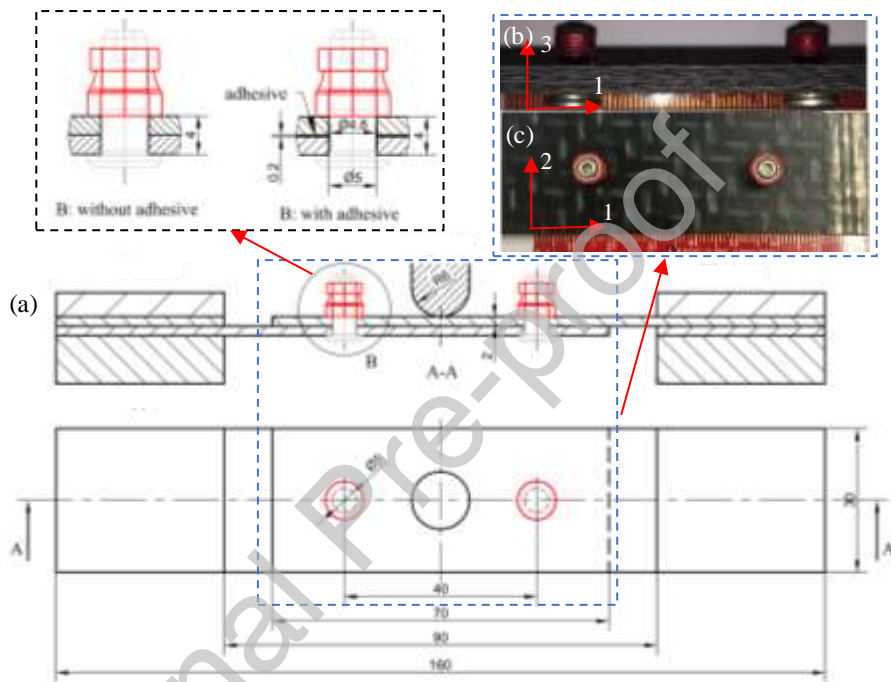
Specimen configurations (all dimensions in mm): (a) Detailed dimension; (b) Side view; (c) Top view of the experimental joint structure.
